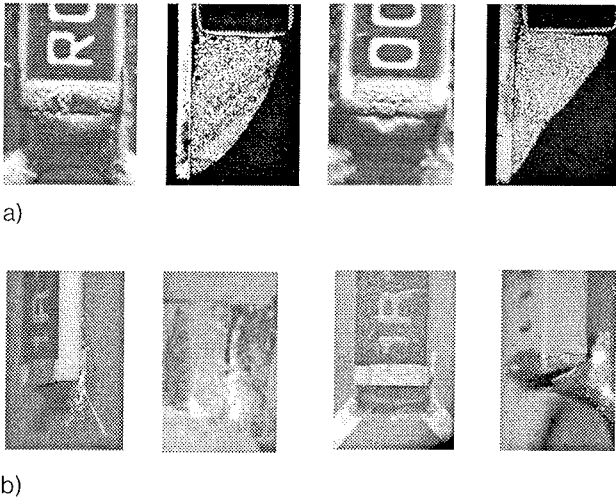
Failures of solder joints; a)after 2000 thermal shocks, b)after 100 mechanical cycles
